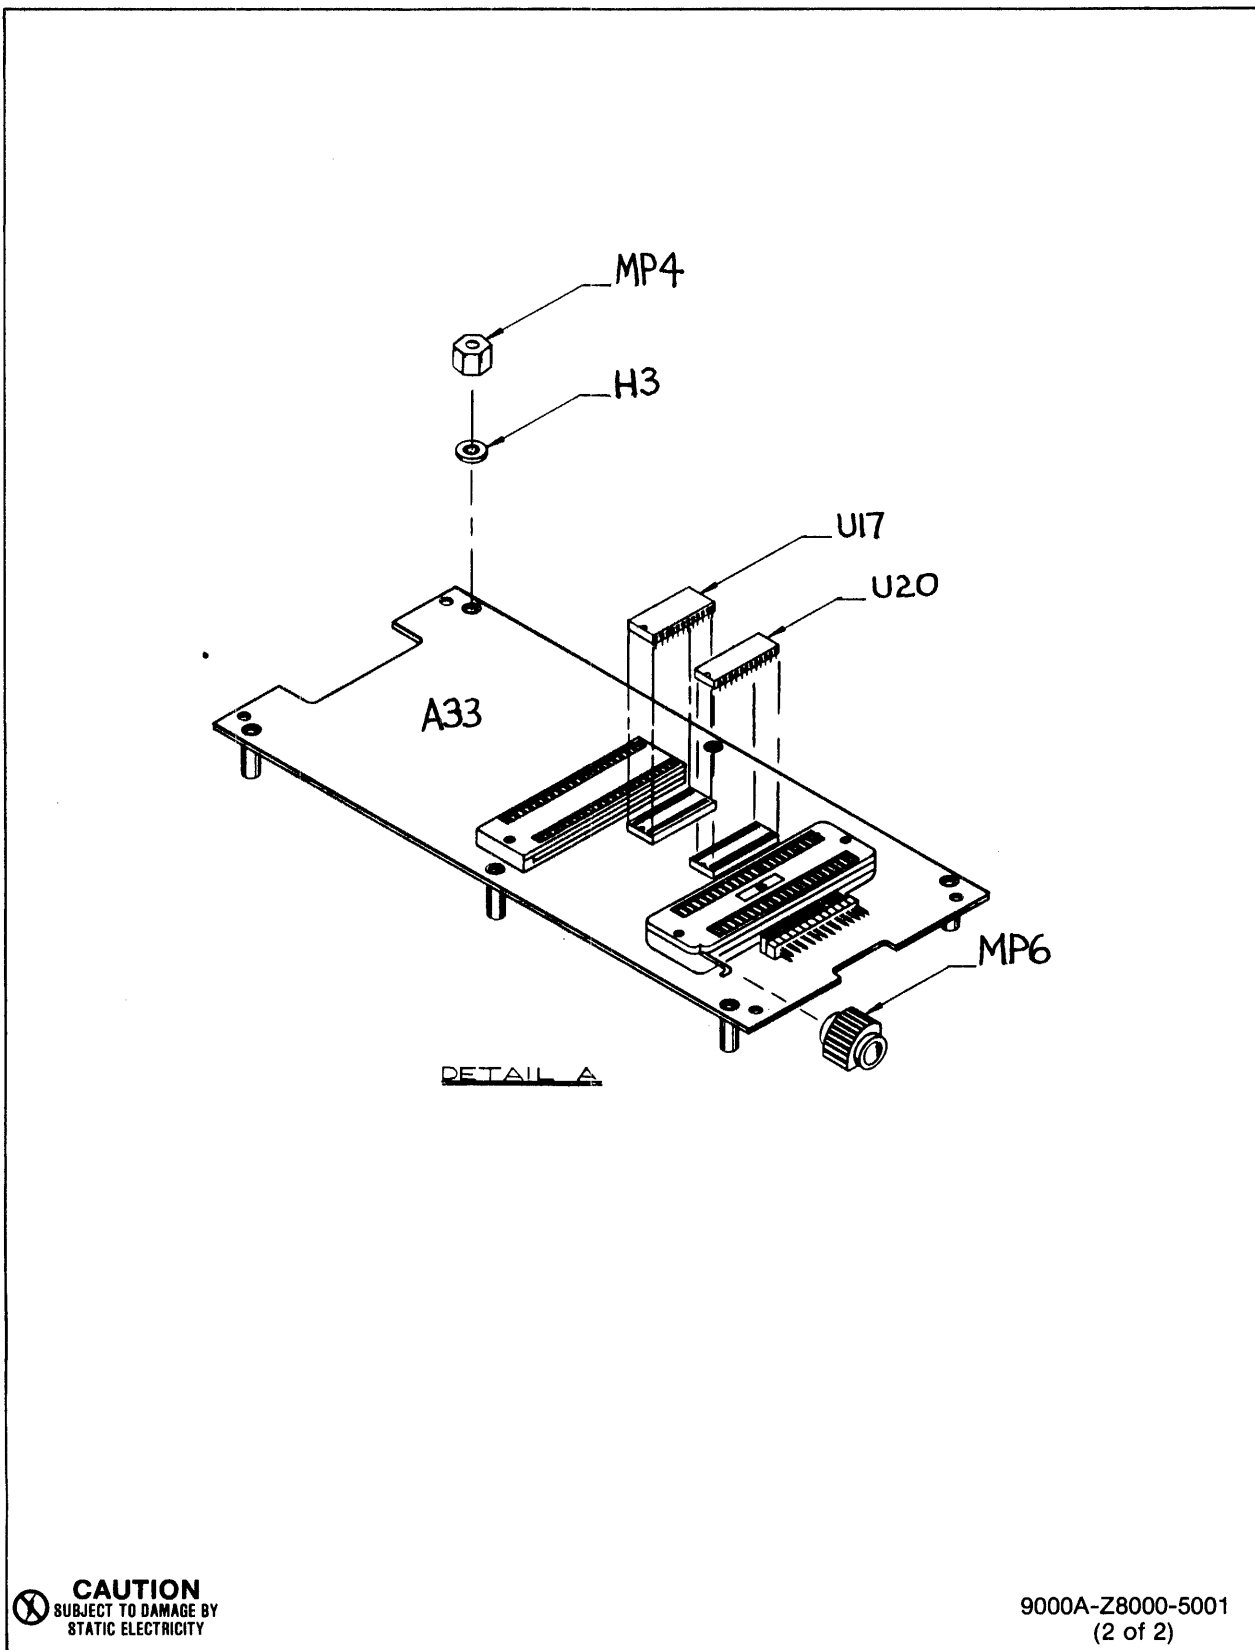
9000A-Z8000 Final Assembly (cont)
